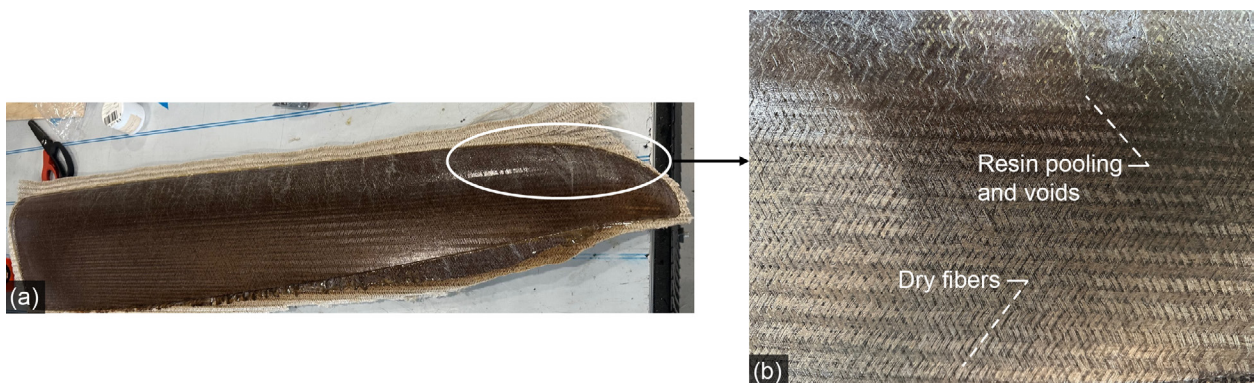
Second trial propeller skin after removal from mold and polyimide liner. (a) Top view. (b) Closeup of top right corner showing inconsistent resin infiltration and dry fibers.
